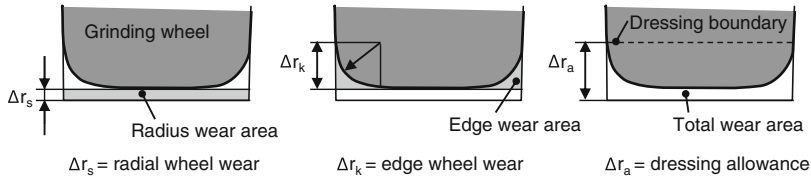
Radius wear and edge wear at a plunge grinding wheel [WERN73, p. 70]
